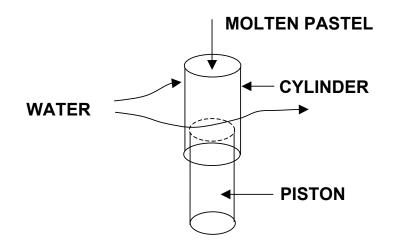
A Piston Cylinder Pair Of The Chalk Machine
